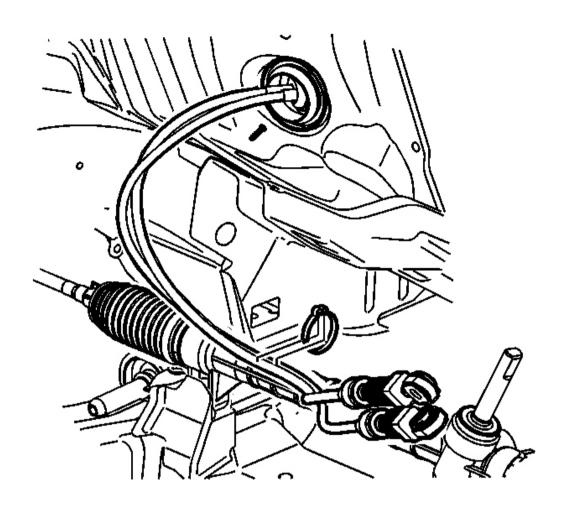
Cable Retainer & Steering Gear Assembly Courtesy of GENERAL MOTORS CORP.
